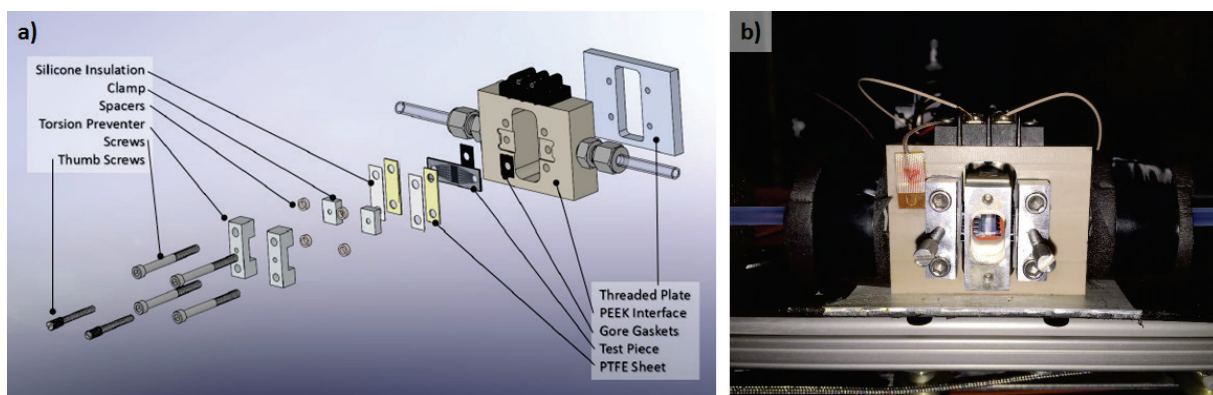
Test section interface (a) exploded and (b) installed views. Gore gaskets provide the fluidic seal while the other hardware is designed to place even pressure on the test section to create the seal and avoid fracturing [7].
